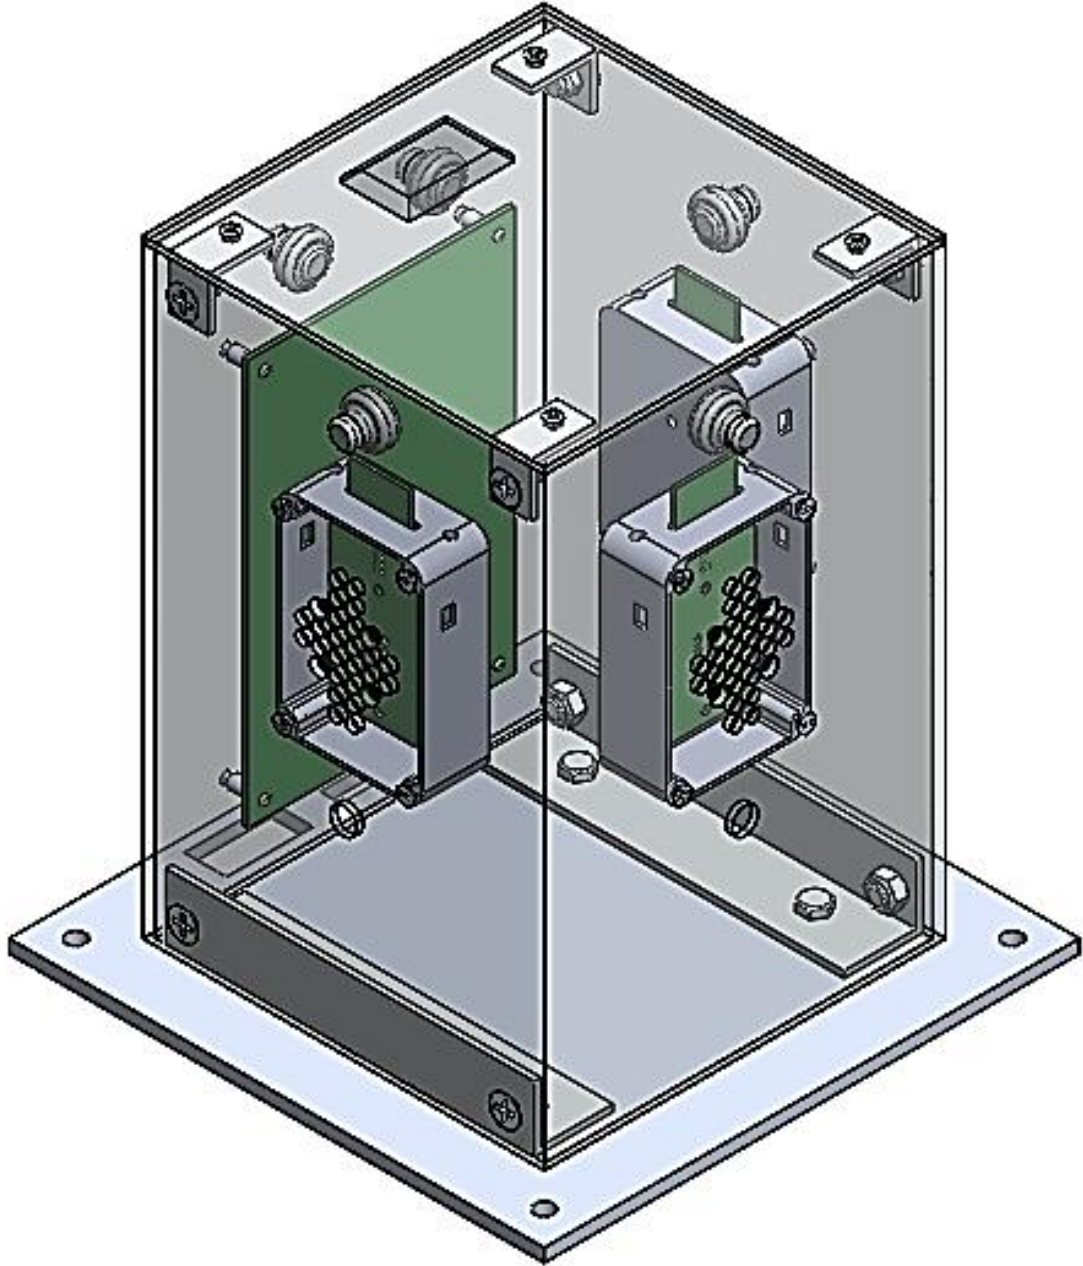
(c) Design of all sides' view of the payload mounted on the HASP plate.
